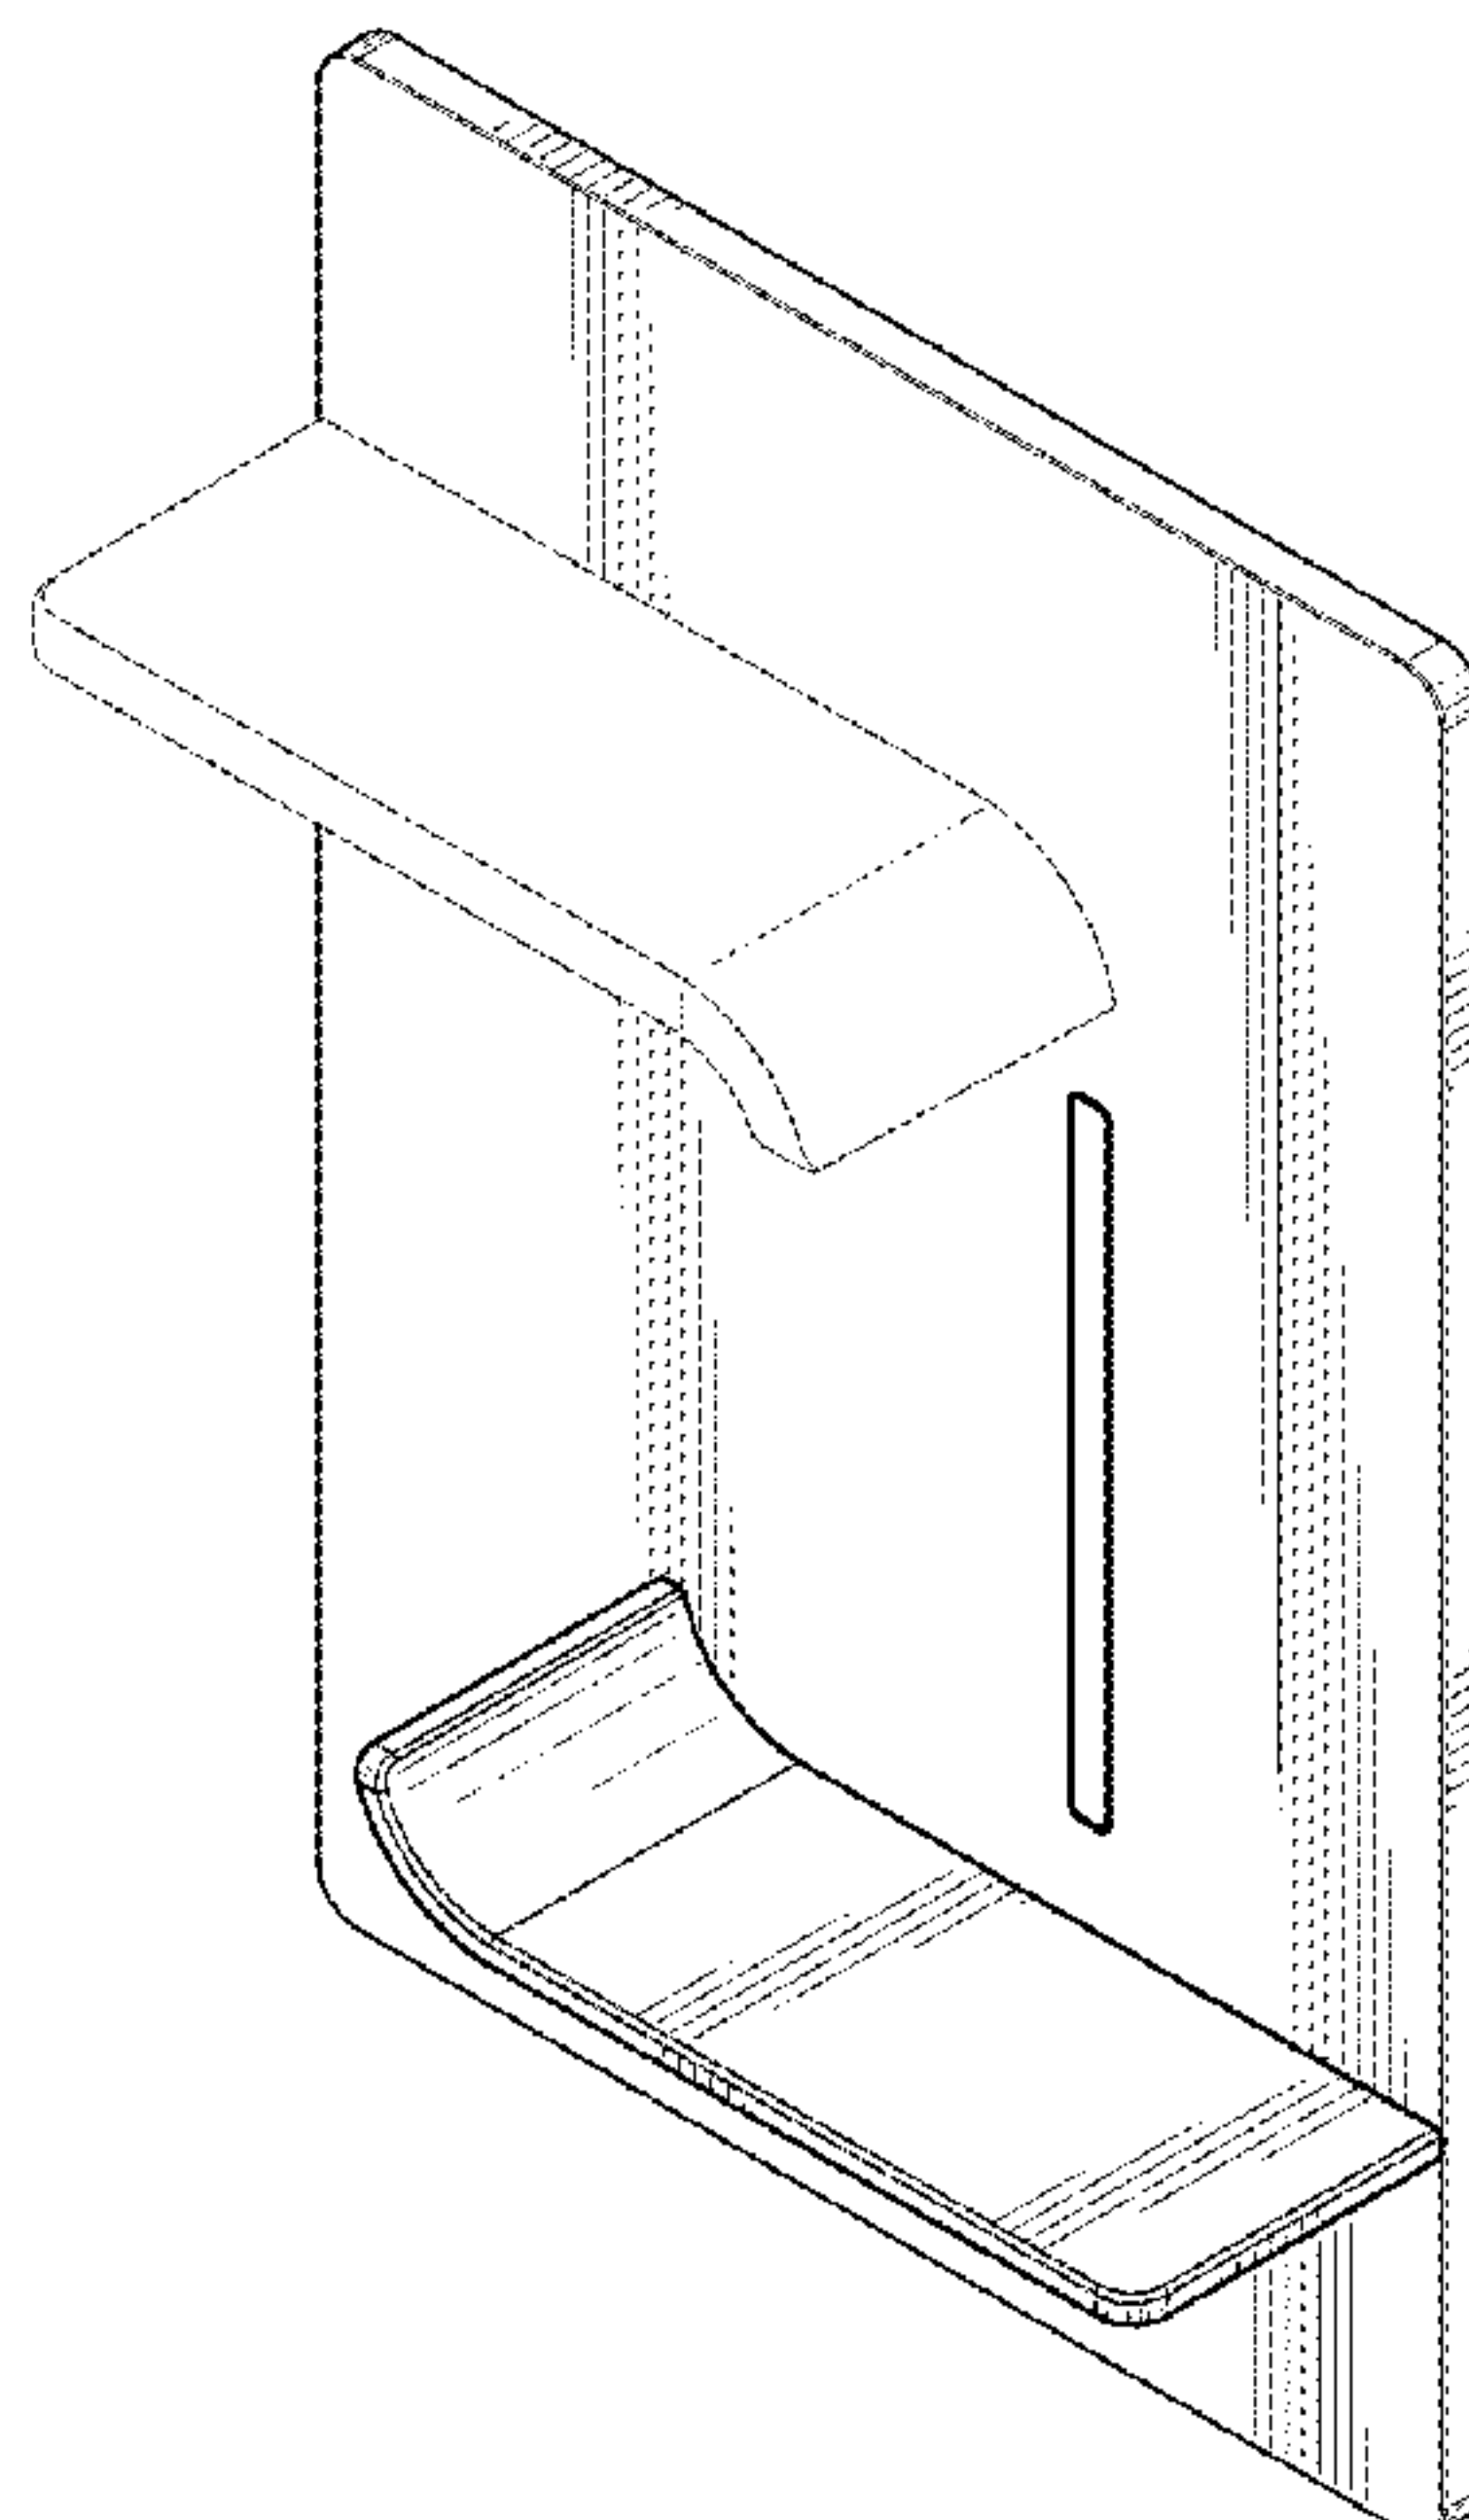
is a front right perspective view of a dispenser, showing our new design;
